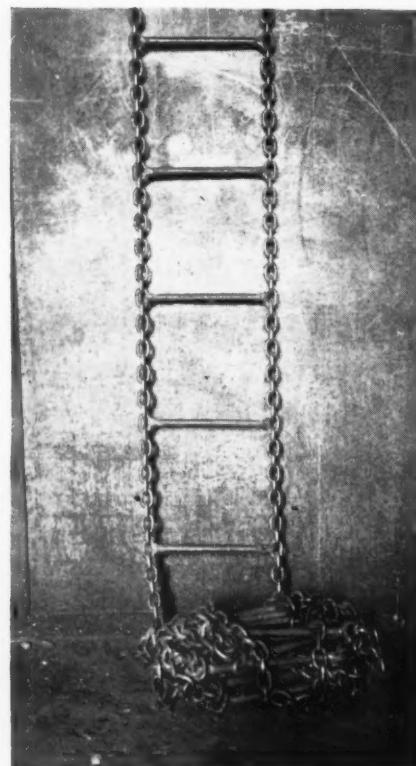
Chain-and-pipe safety ladder fabricated by welding.
